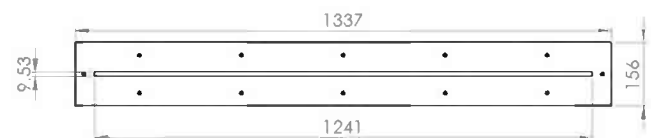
Dimensions (mm) for the 9.53 mm aperture discharge plate.
